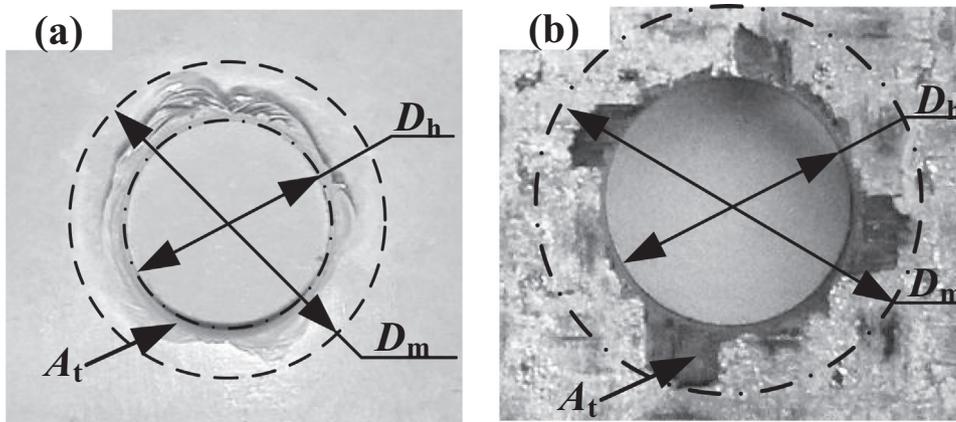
Defects of hole edge. (a) edge chipping size, (b) tearing.
